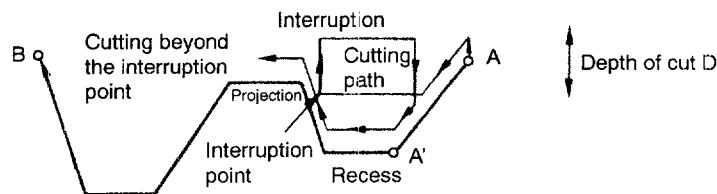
Example of Cutting – Cutting Path Crosses the Projection beyond the Recess
